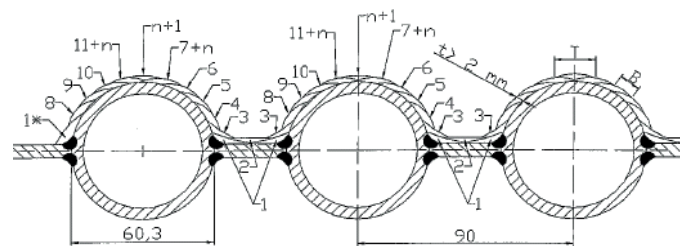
The WPS sketch showing the way of making beads of the surfacing weld on the sheet pile wall in the scale 90 mm (Ø 60,3 mm pipe)
